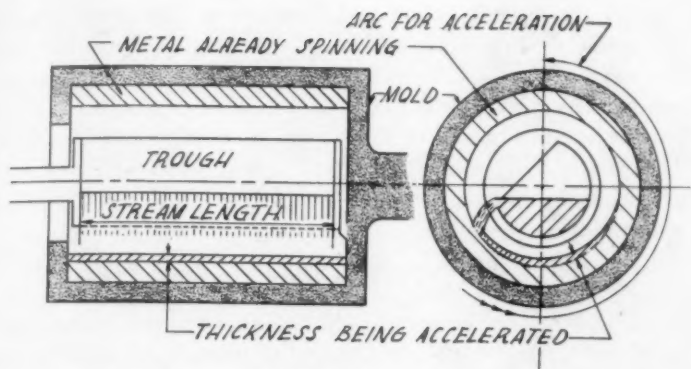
DESIGN OF TROUGH POURED HORIZONTAL MOLD.
